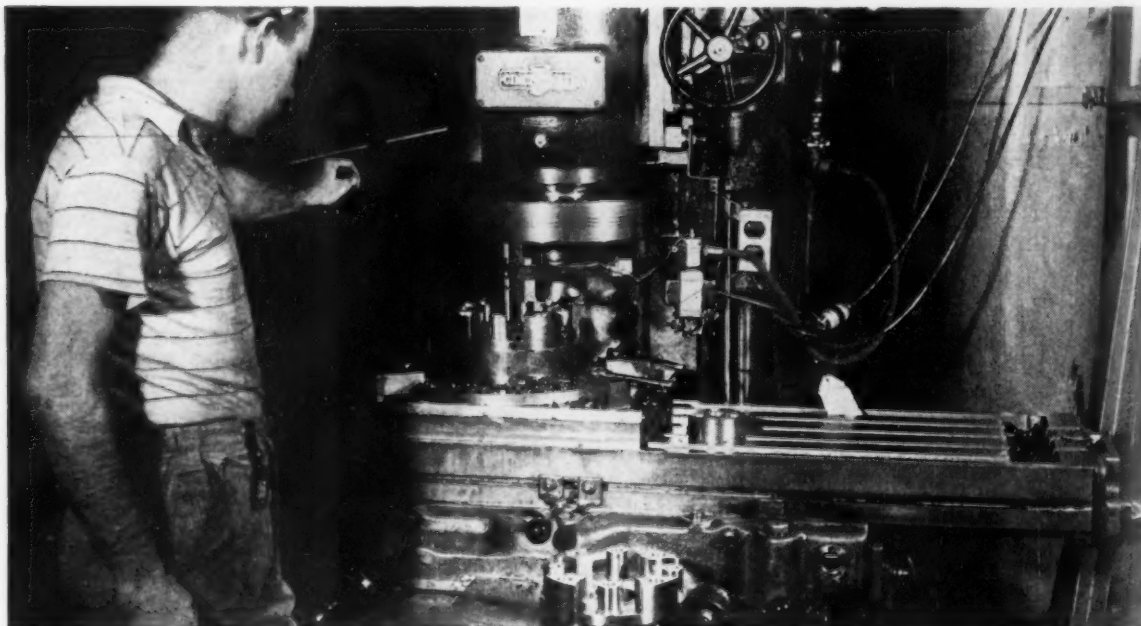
Planetary carrier mounted in index fixture for hollow milling operation on flywheel-equipped Cincinnati
